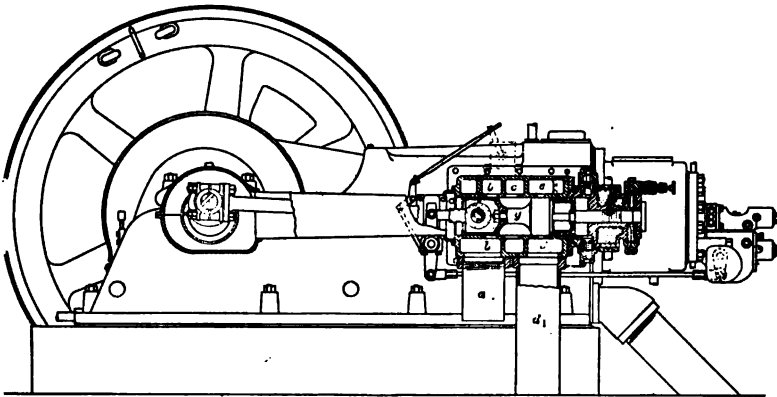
Standard Fuel Oil Diesel compressor and section.
